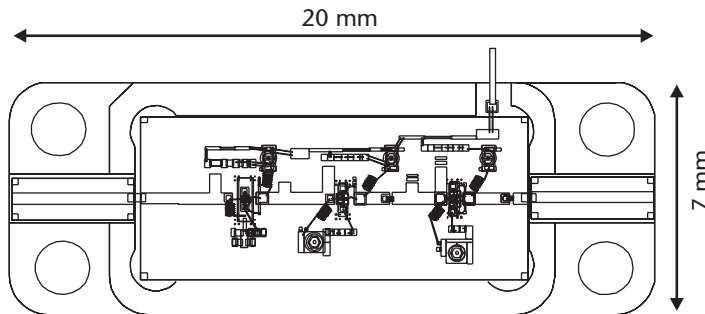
Assembly drawing of the three-stage feedback amplifier.
